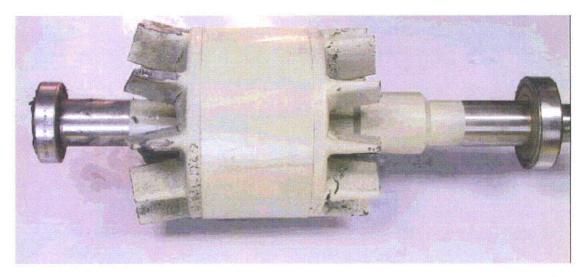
Deflected cooling fins on left hand side with cracking evident. Right hand side cooling fins also demonstrate cracking.
